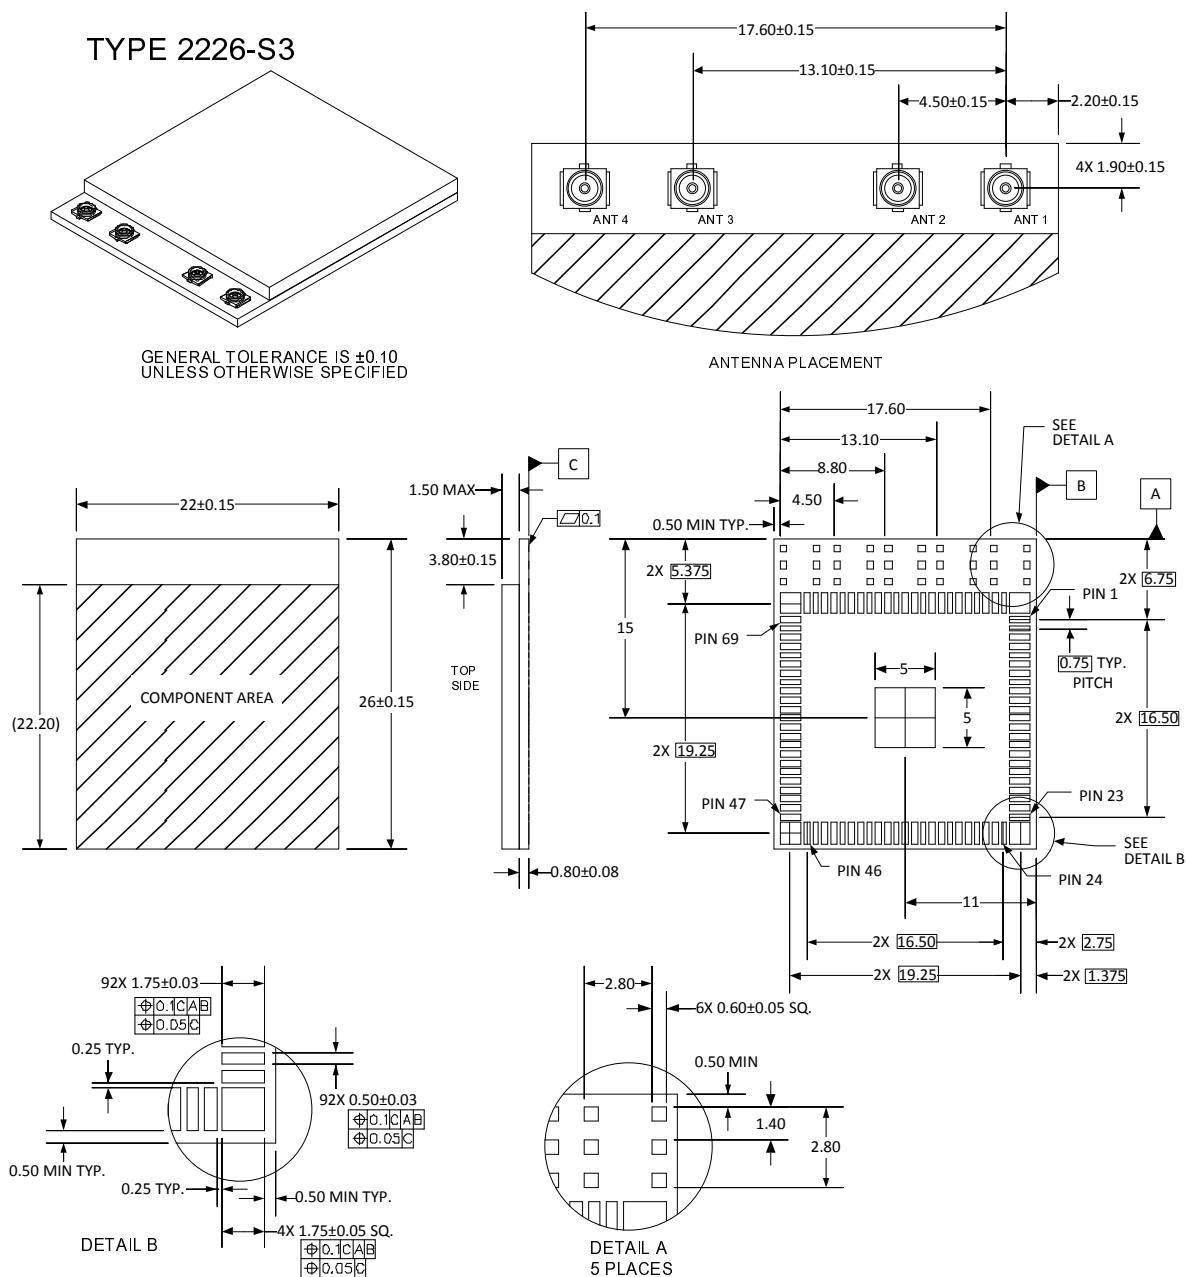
M.2 Type 2226-S3 Mechanical Outline Drawing
